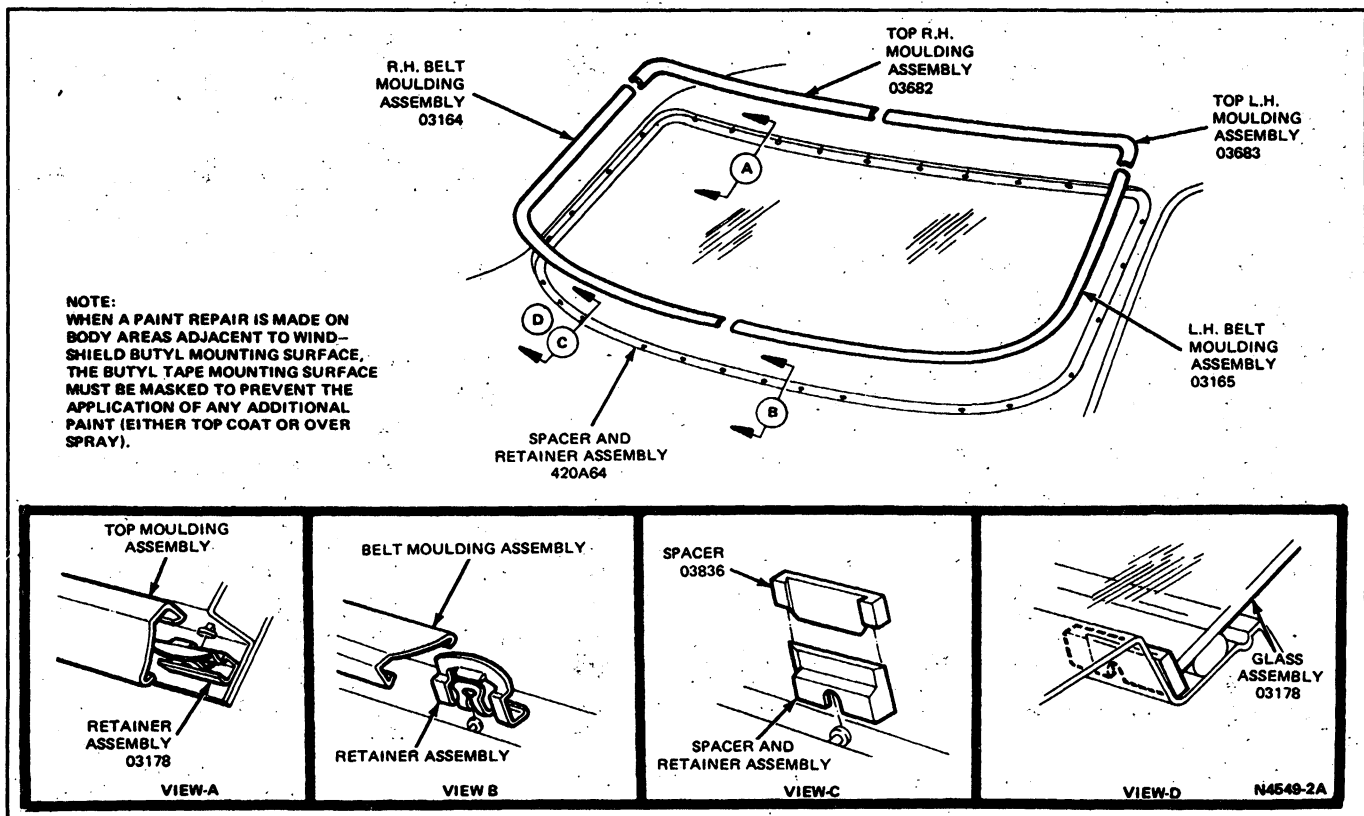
Windshield Clips and Mouldings—E-150—E-350
